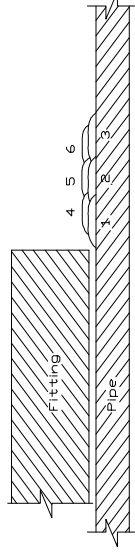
Suggest method of reducing gap between pipe and fitting before welding to fillet throat
